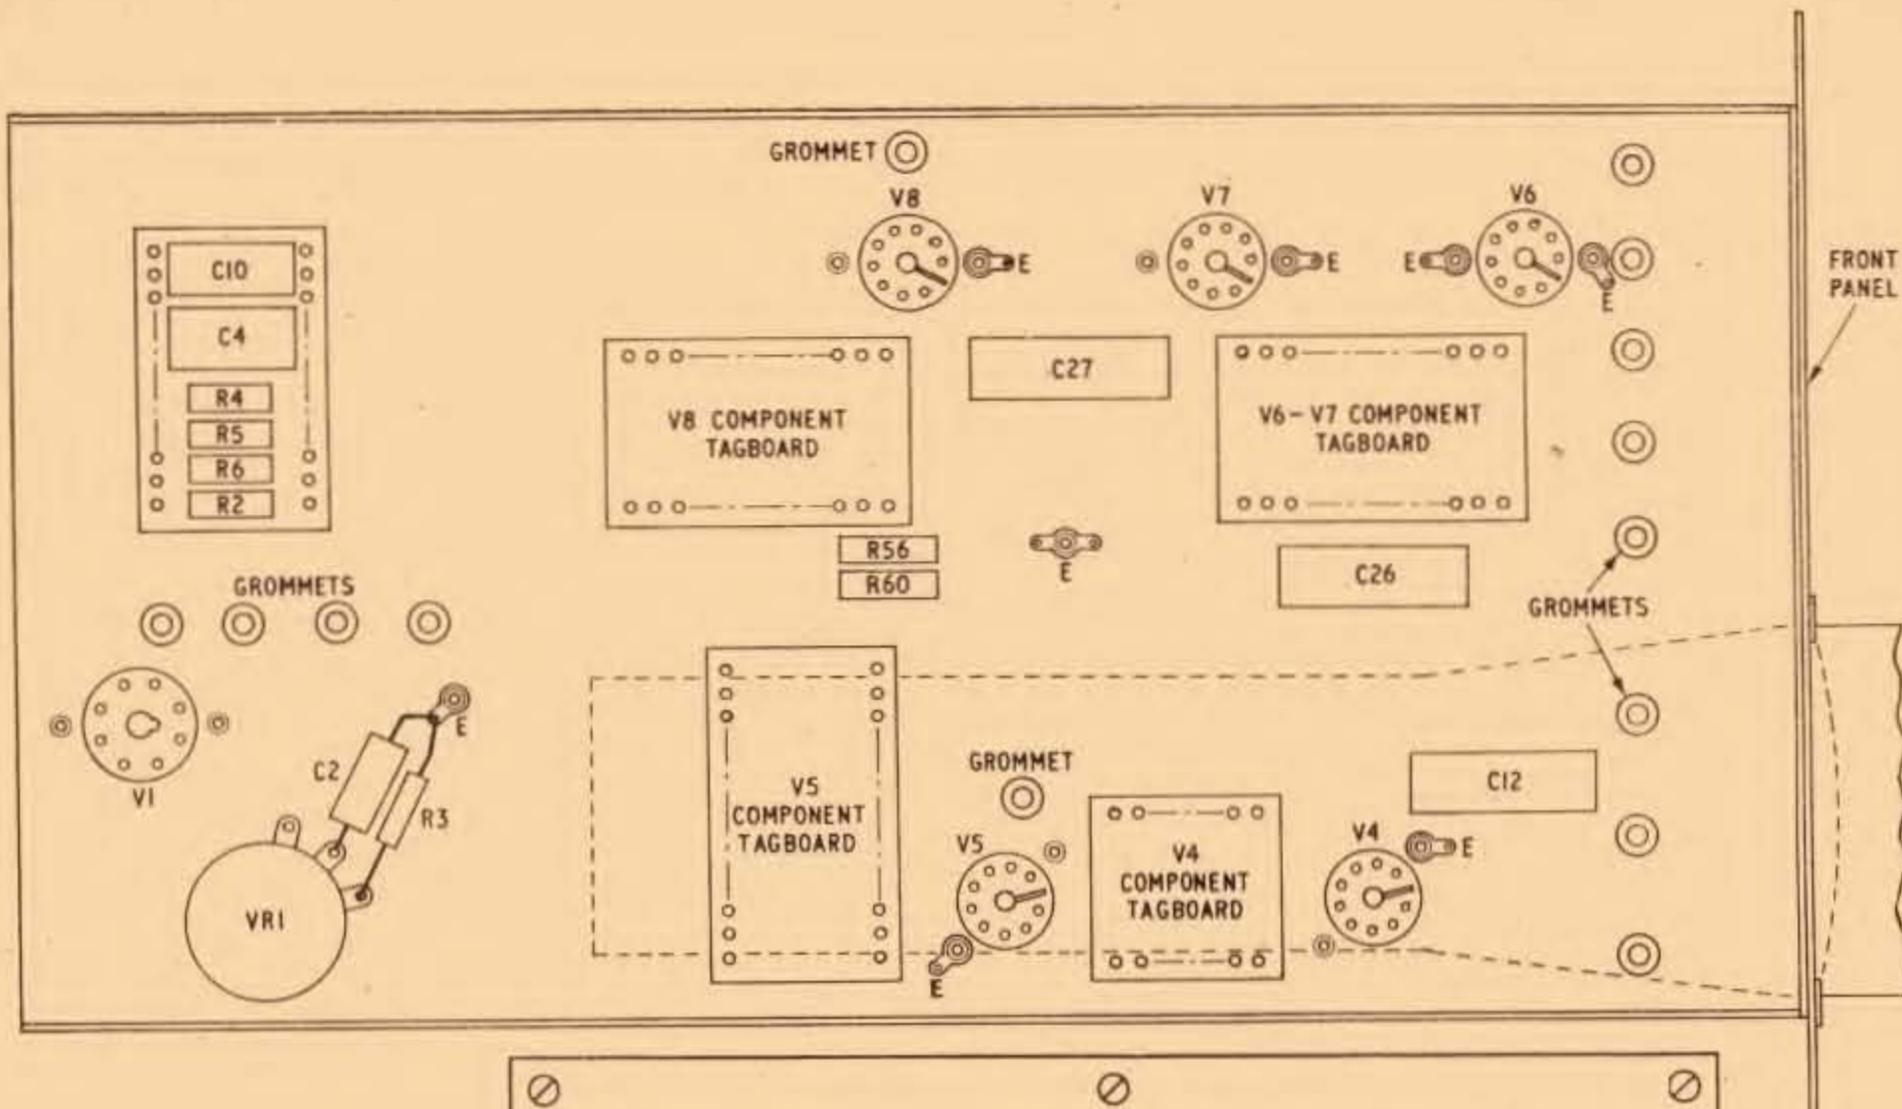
(above). Layout of tag boards and other major items underneath the chassis. Details of the component tag boards are given in Fig. 9
